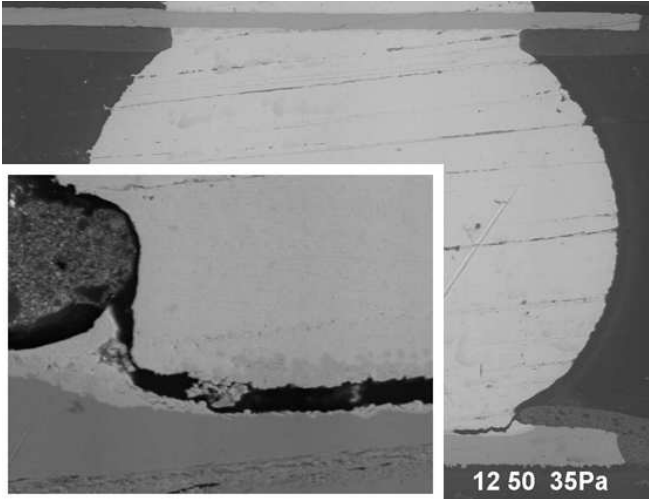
SEM image of a failed SAC solder joint in an 8-stack assembly [26].
